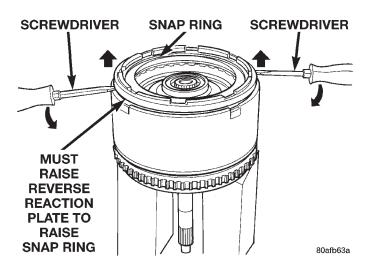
Seating Snap Ring to Determine Reverse Clutch Clearance
